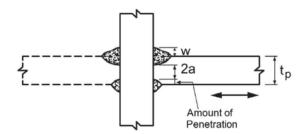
Loaded Discontinuous Plate Element Connected by a Pair of Partial Joint Penetration Groove Welds
